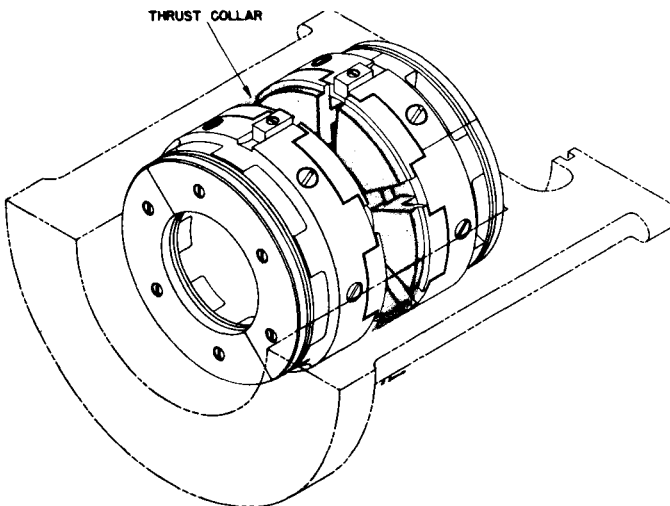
Double acting self-equalizing thrust bearing assembly (thrust collar removed) (Courtesy of Elliott Company)
